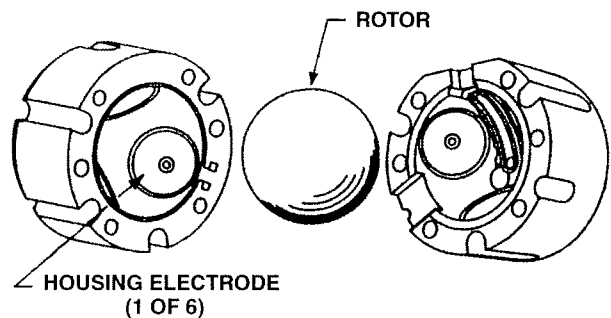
Exploded view of a gyroscope rotor and its housing.
